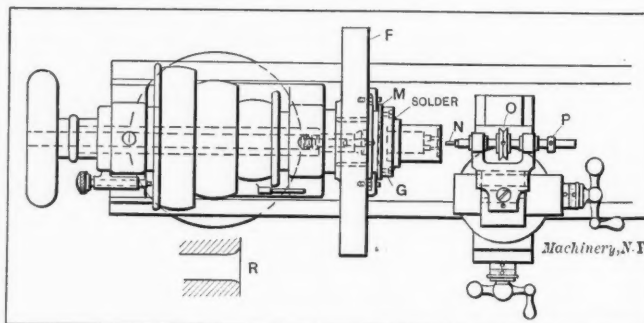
Finishing the Hole in a Bench Lathe with a Diamond Lap
